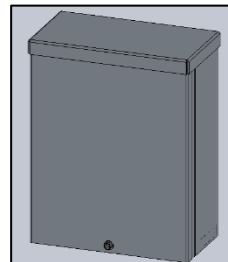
REMOTE DRIVER BOX WITH DRIVER INSTALLED
